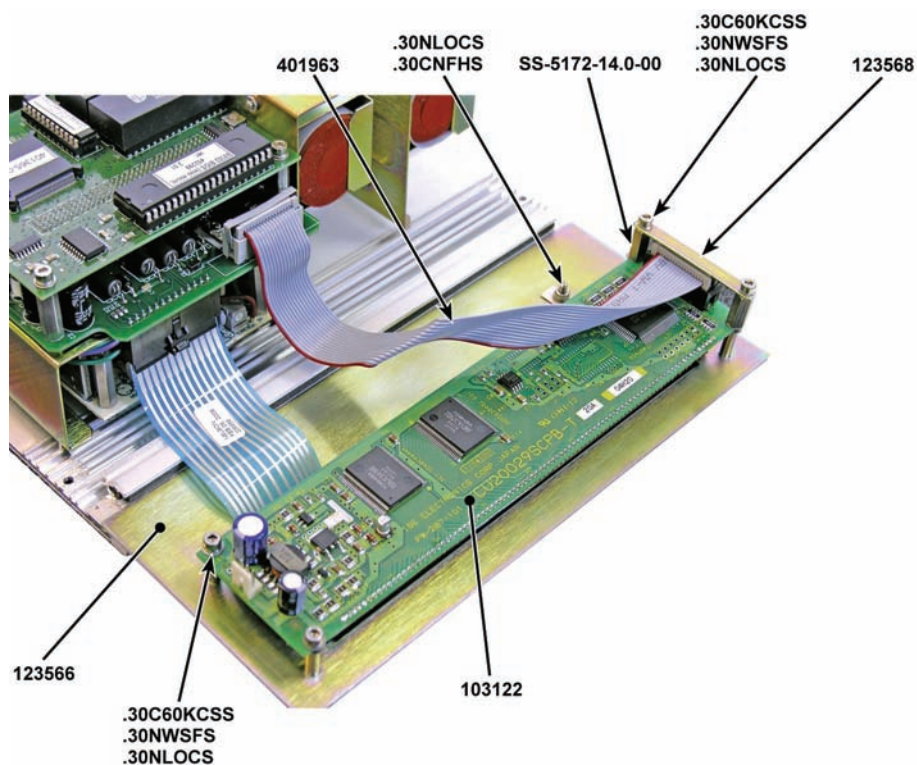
RPM4 Illustrated Parts Breakdown of Display Assembly
